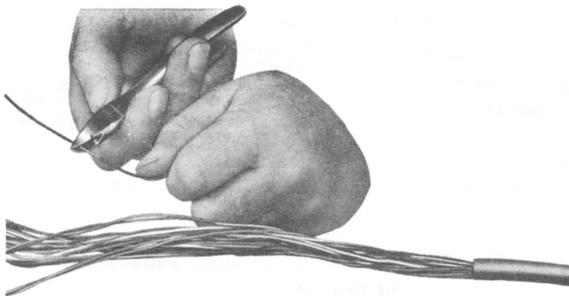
Skinning Conductors of Inside Wiring Cable
